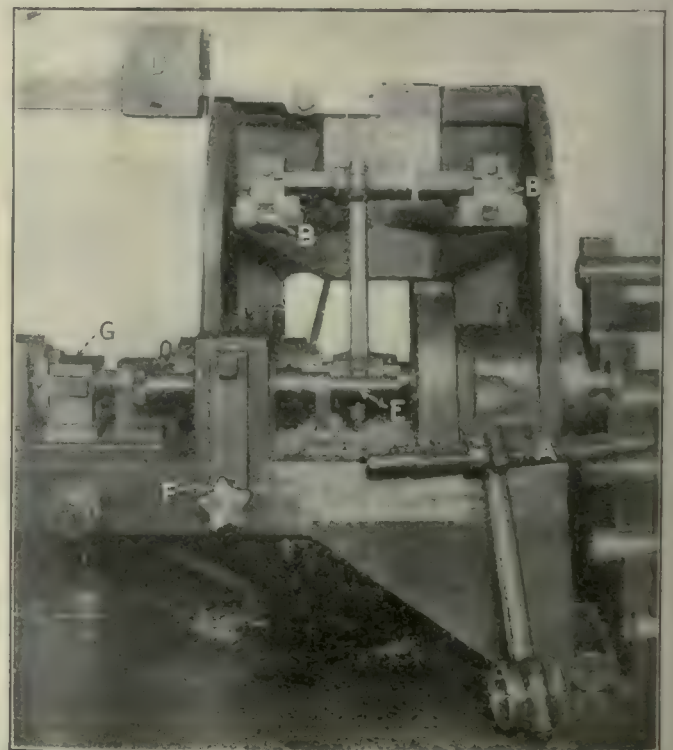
SPECIAL FIXTURE FOR FINAL REAMING
